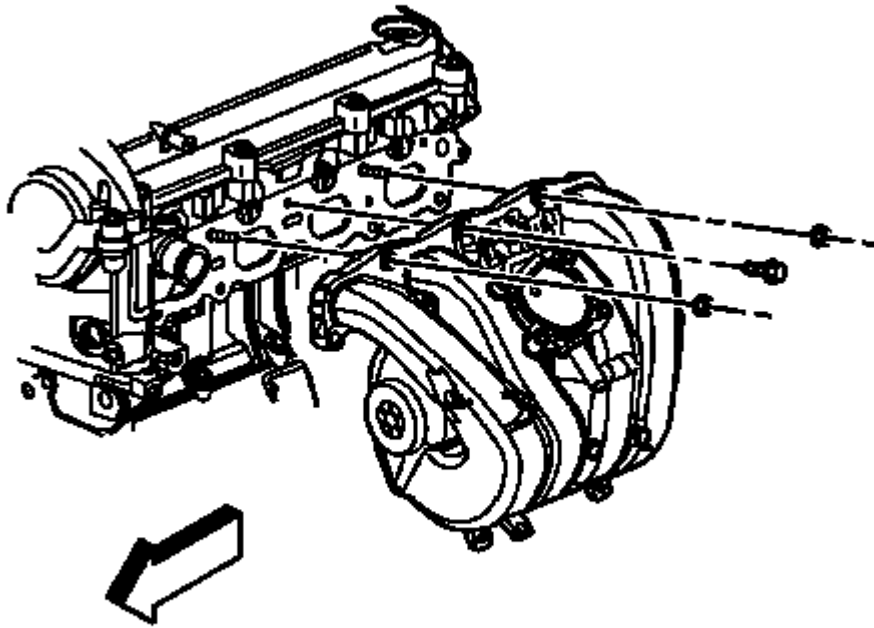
Identifying Intake Manifold, Bolts & Nuts
